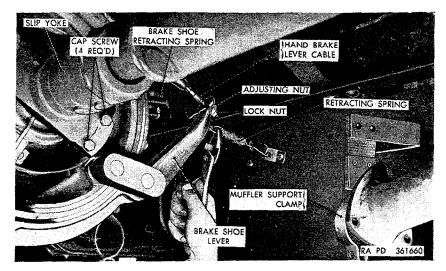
Universal joint and handbrake mechanism at rear of transfer.
